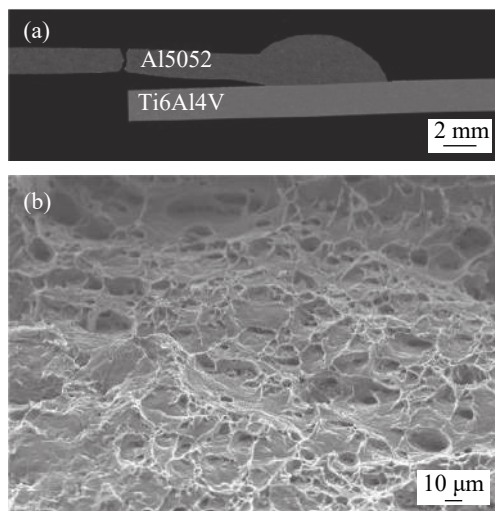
Fracture phenomena of Al5052/Ti6Al4V joint at 60 A welding current (a) Fracture location (b) Fracture surface
